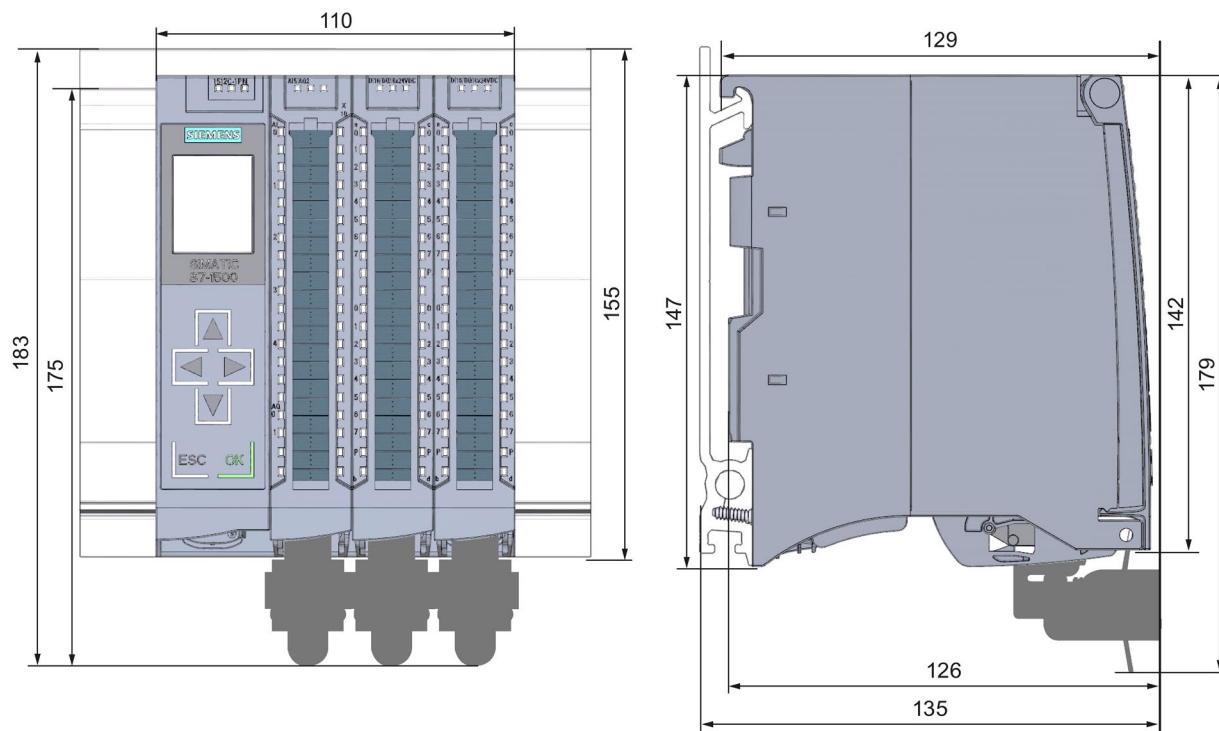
Dimension drawing of CPU 1512C-1 PN – front and side views
